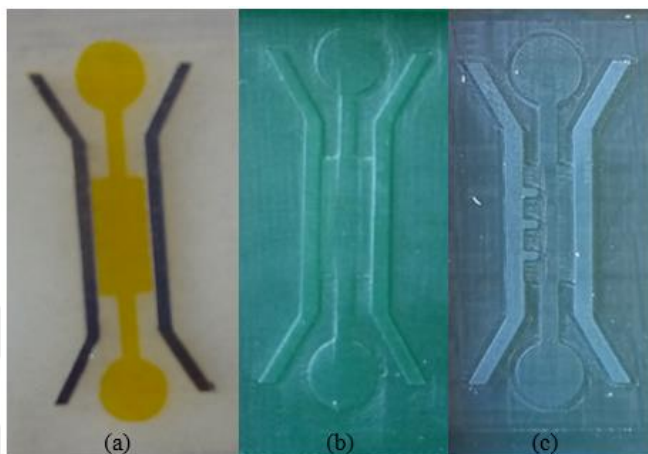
Photographs of the molds for PDMS microfluidic chip a) made of tapes having 50/200 μm height, b) wax mold having 150/400 μm , c) wax mold having 150/400 μm with three grooves.
